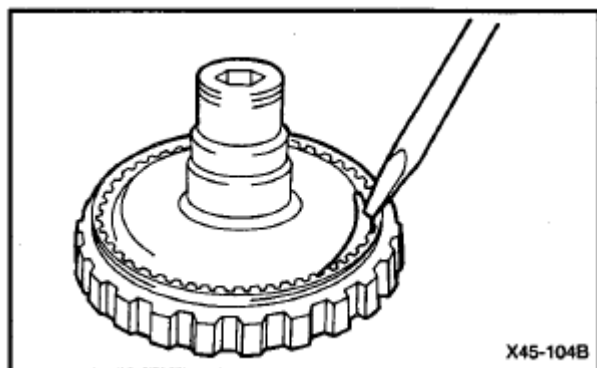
Removing Snap Ring From Rear Of Output Flange
